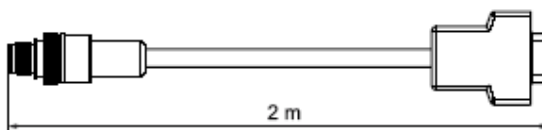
Connecting cable M12 ↔ sub-D (MOBY D)
